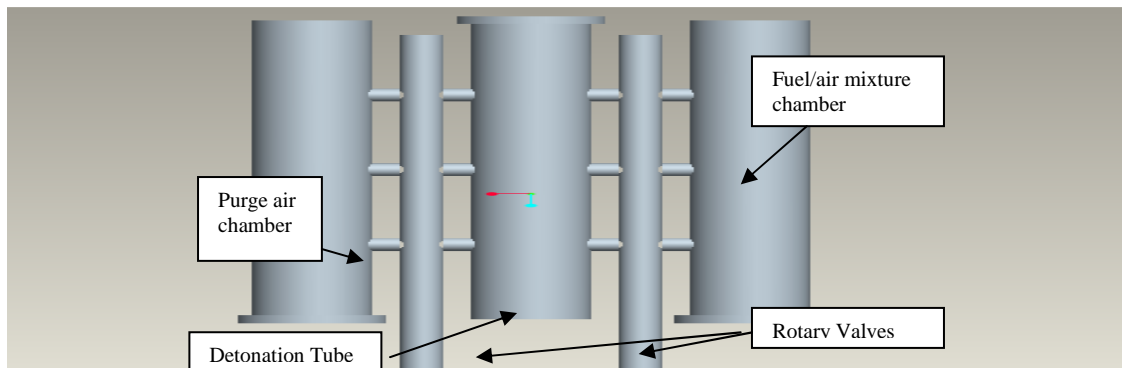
CAD Schematic is Showing the Top View of Important PDE Components.
